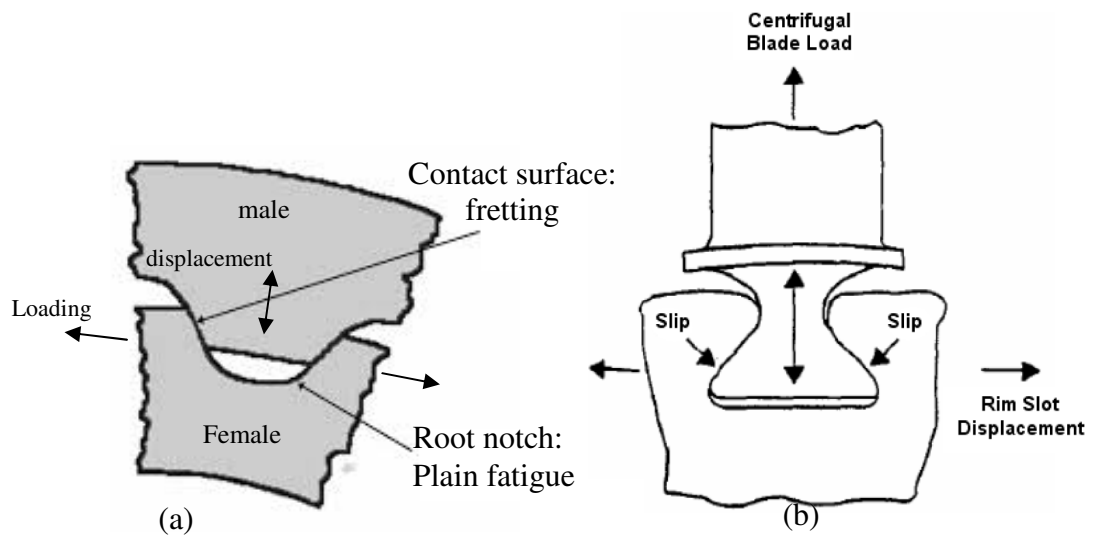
fretting fatigue on (a) spline coupling (b) dovetail joint.
